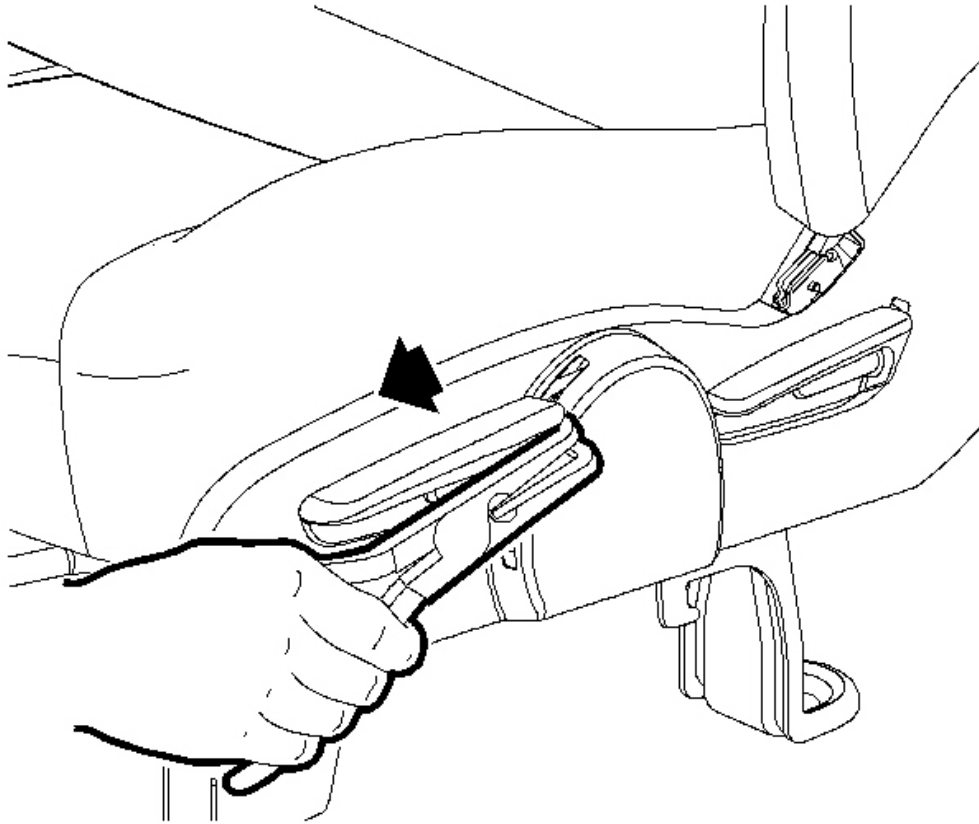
Removing/Installing Seat Recliner Handle Trim
